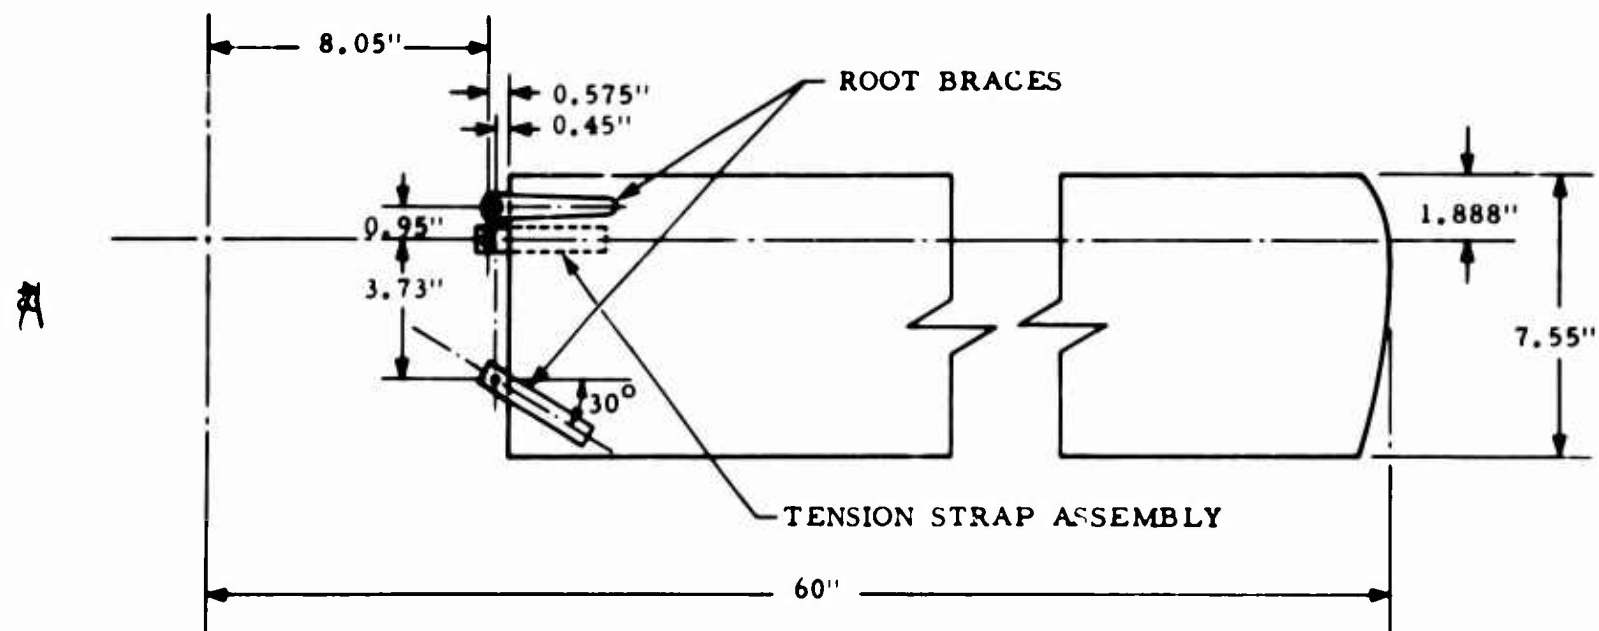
BLADE AND BLADE ATTACHMENT GEOMETRY
